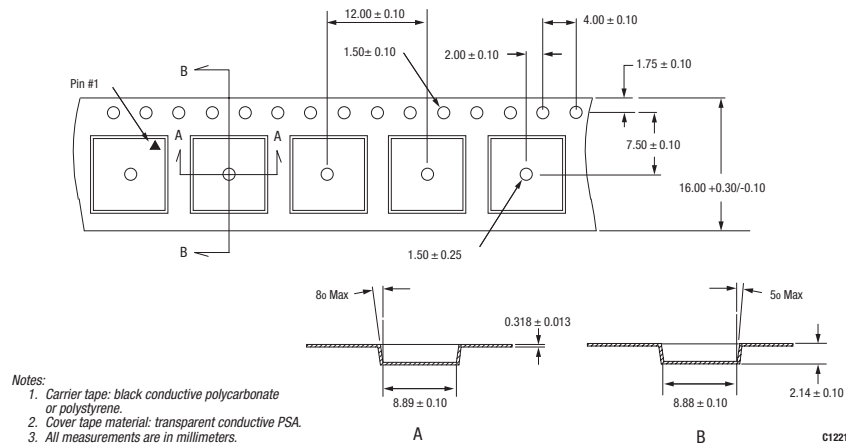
CX65100 8-Pin LCC Tape and Reel Dimensions
